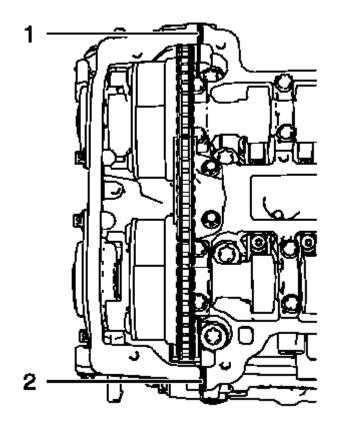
Camshaft Position Actuator Solenoid Valves Proper Position Courtesy of GENERAL MOTORS COMPANY
